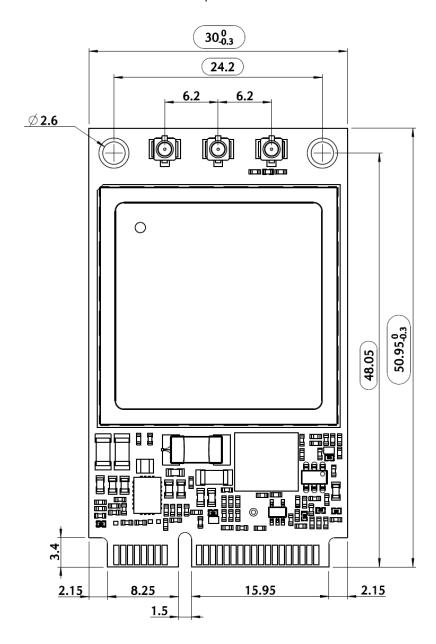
LE910Cx-mPCIe Top View (Dimensions are in mm)
